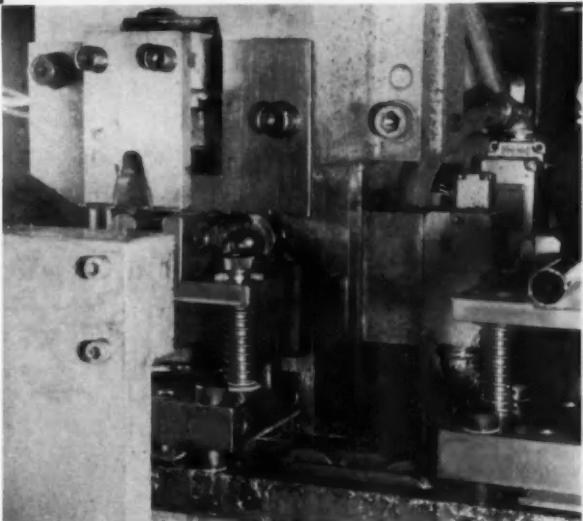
Station at which tube ends are sized and shaped by combined use of arbors or punches and dies. Fixture at left holds a tube whose far end has been shaped and after the fixture has been released by springs that permit floating action.
